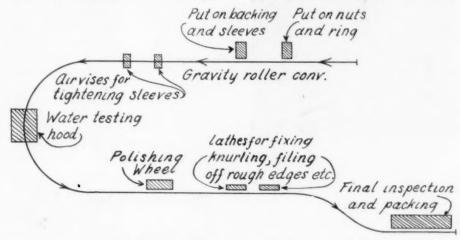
Roller Conveyor Assembly Line for Nozzles
